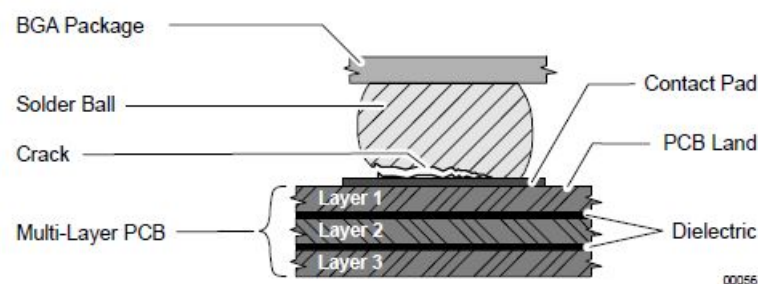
Crack development at the solder ball- PCB junction [41]
